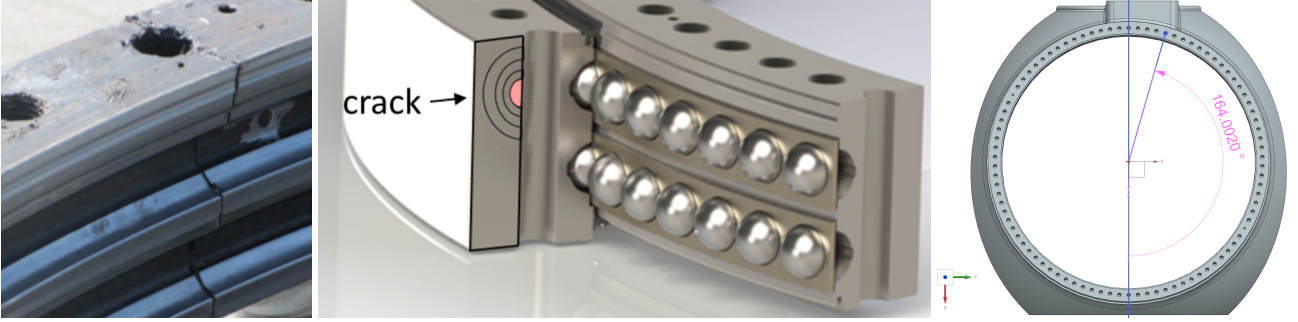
Example of actual ring fracture at bolt hole of a pitch bearing (Source: Romax Technology), crack initiation mechanism and location of the specific bolt hole considered in this work
